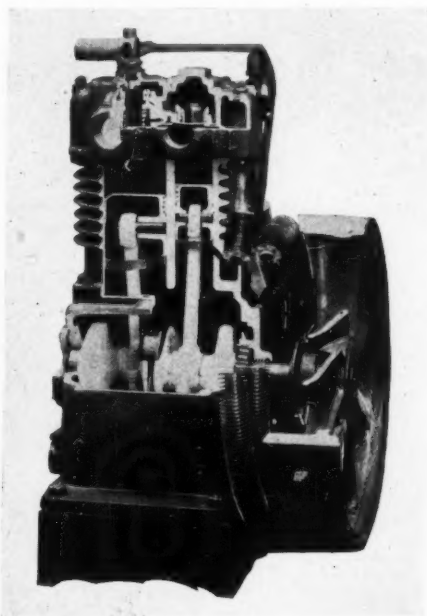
Fly wheels, pistons, cylinders, cylinder head and base in small compressors are made of cast iron
